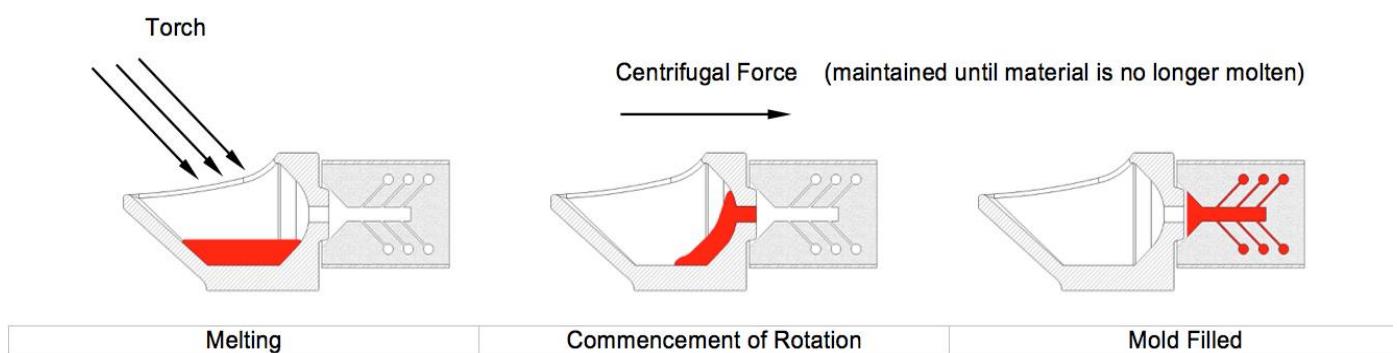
Schematic representation of casting in a centrifugal machine using a torch. The axis of rotation is vertical and is to the left of the illustration, so the centrifugal force is oriented to the right, as shown.
